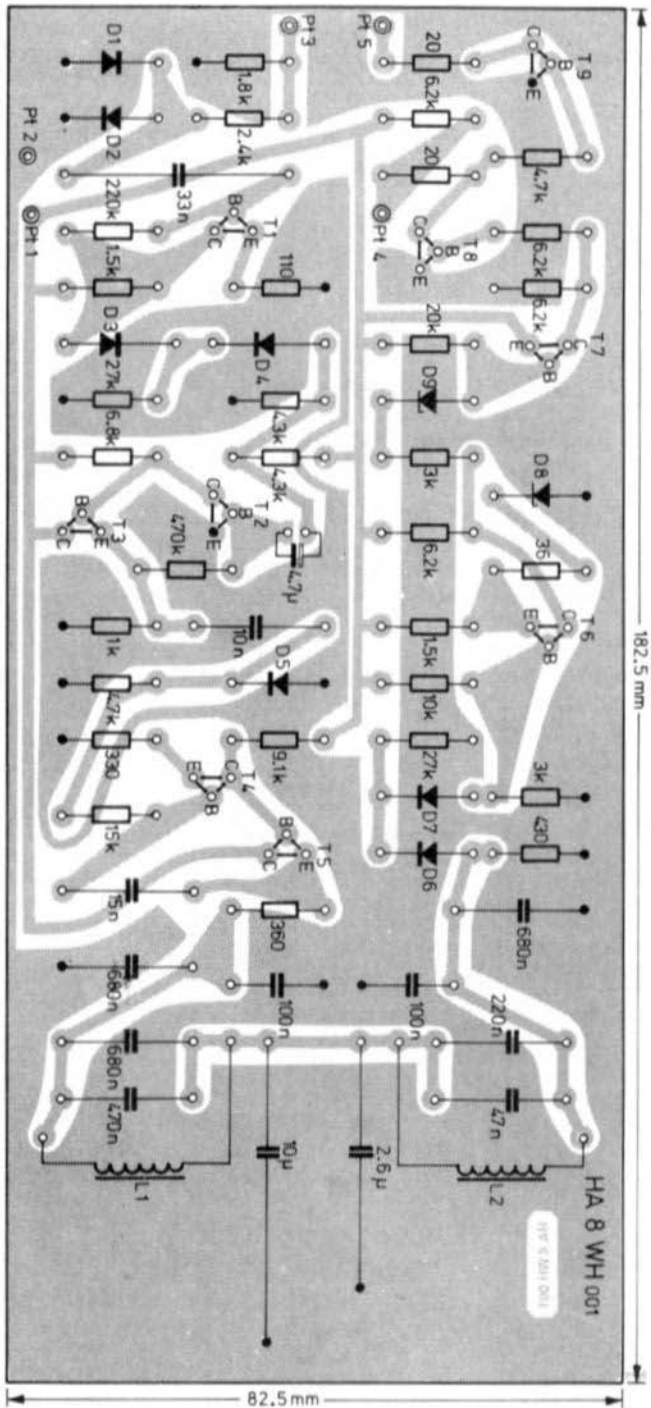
Printed circuit board HA 8 WH 001 (discriminator)
